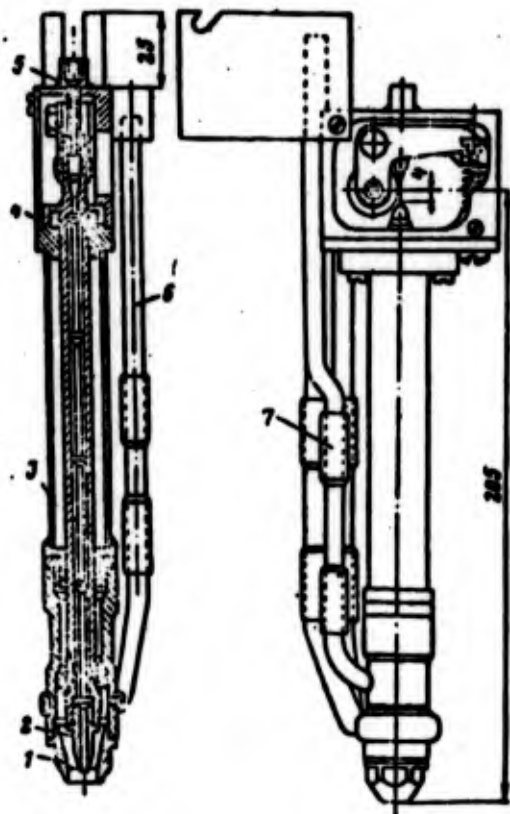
Welding head: 1 - nozzle; 2 - changeable tip; 3 - burner; 4 - casing; 5 - guide sleeve; 6 - tube of cooling feed; 7 - tube of protective gas.
